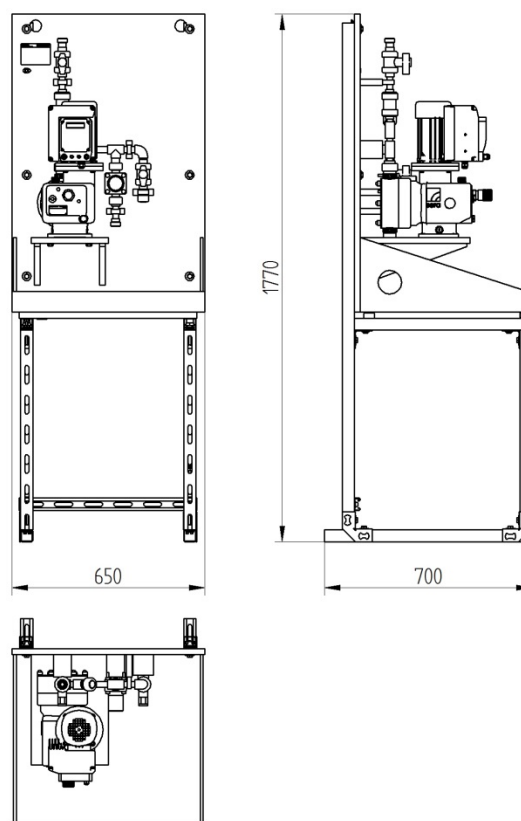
Dimensions of the CVD1s (floor mounting, steel stand)
